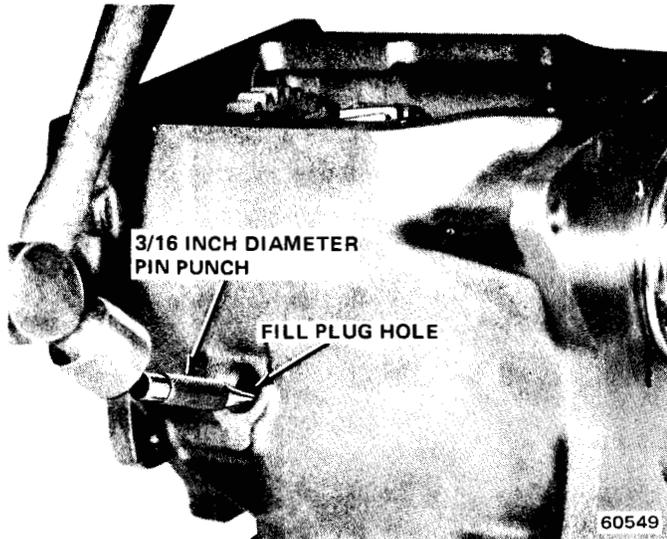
Removing-Installing Countershaft Roll Pin
